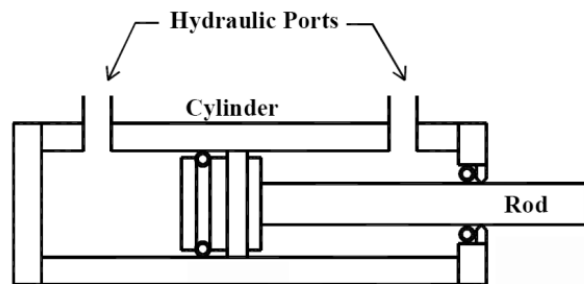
Hydraulic ports of a double-acting cylinder.
